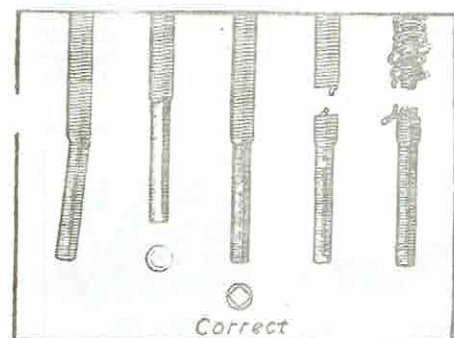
DAMAGED INNER SHAFT. Examine inner shaft ends for wear or other damage. Before fitting new inner shaft ensure instrument main spindle is free.
